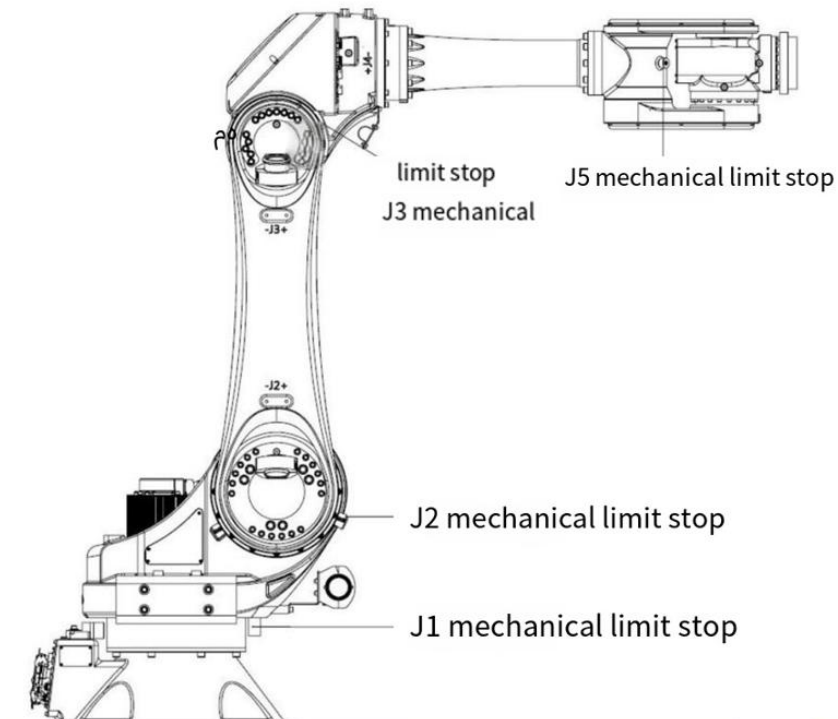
Mechanical Brake on RX3-A650-2700/RX3-A680-2560 Operator
